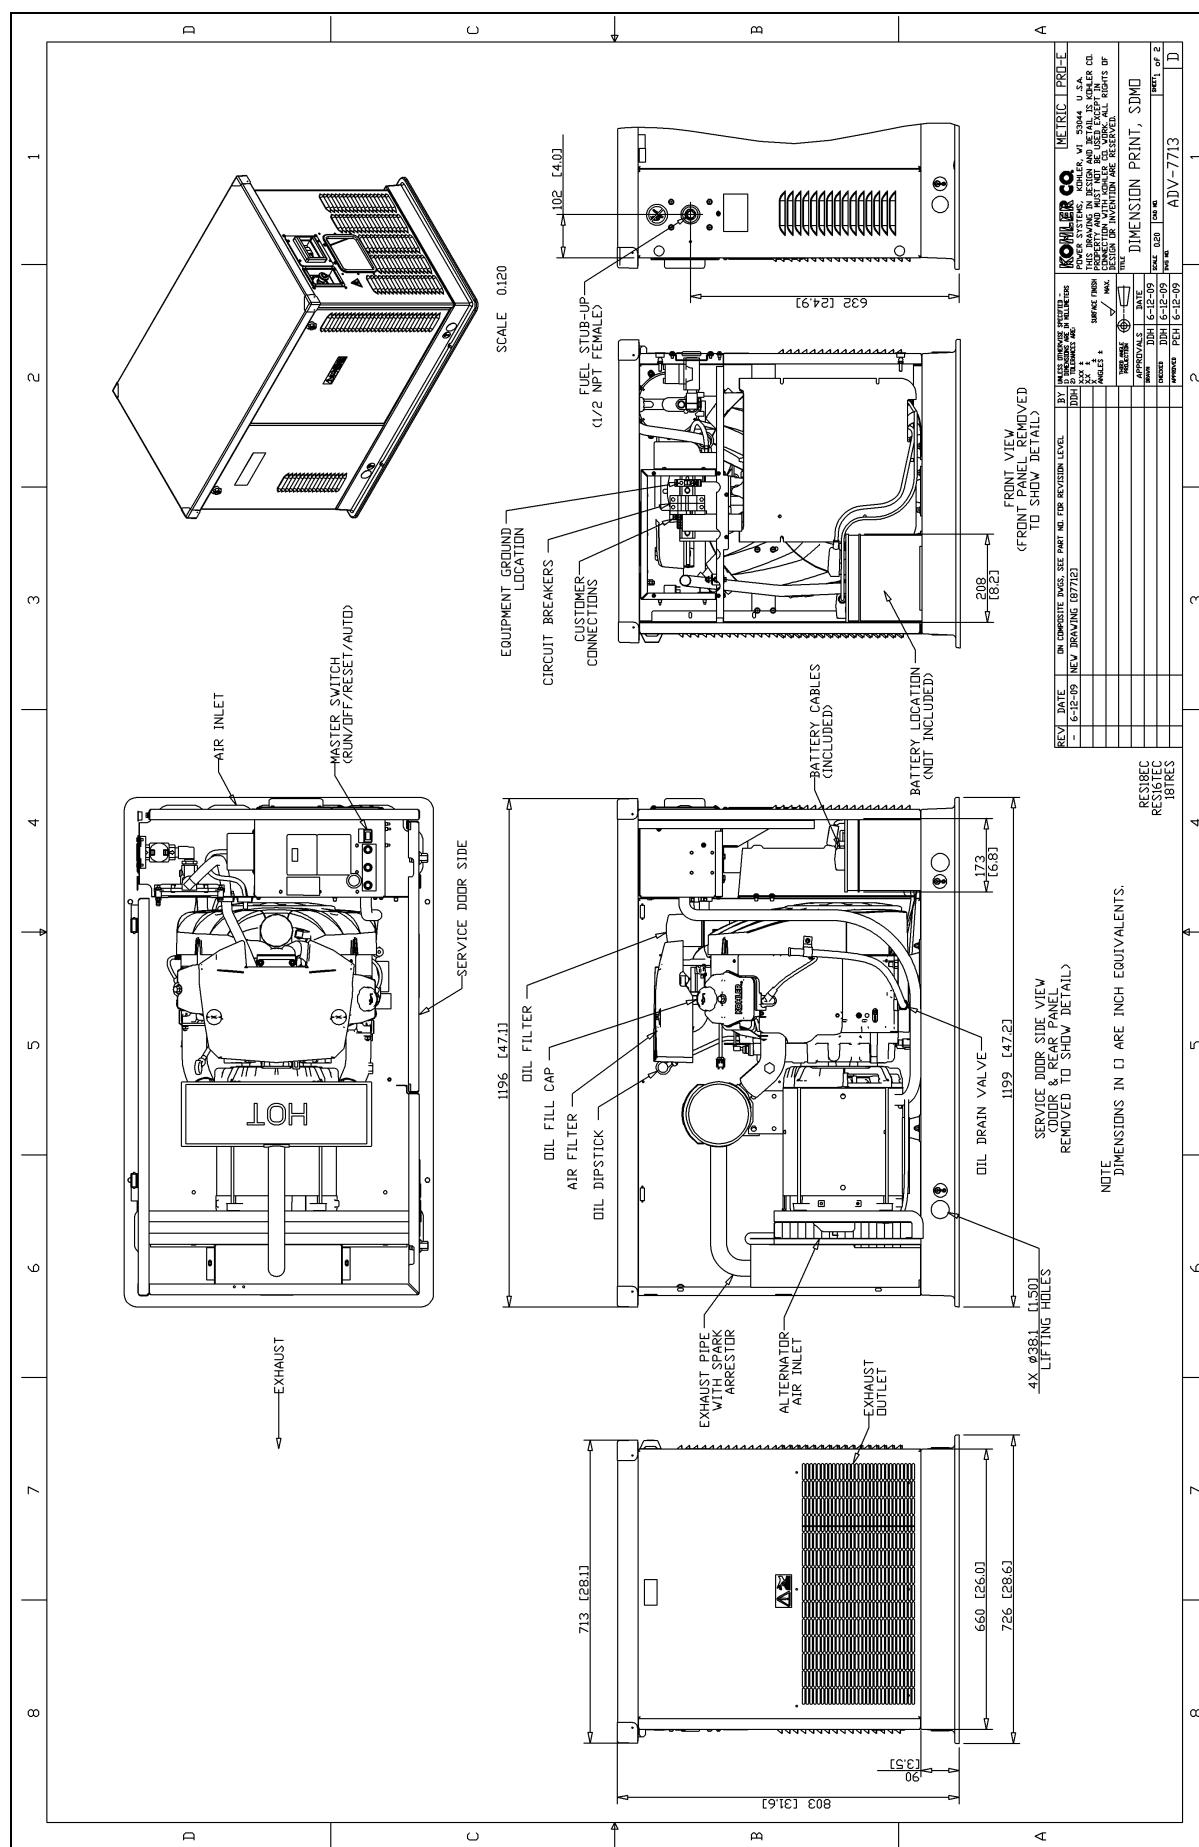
Generating set dimensions and assembly instructions, RES 18 EC / RES 16 TEC
